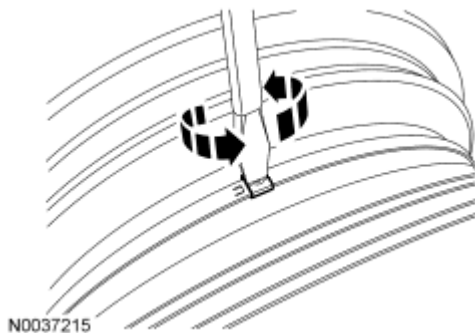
Identifying Twisting Motion Using Large Screwdriver To Unbuckle Strap
